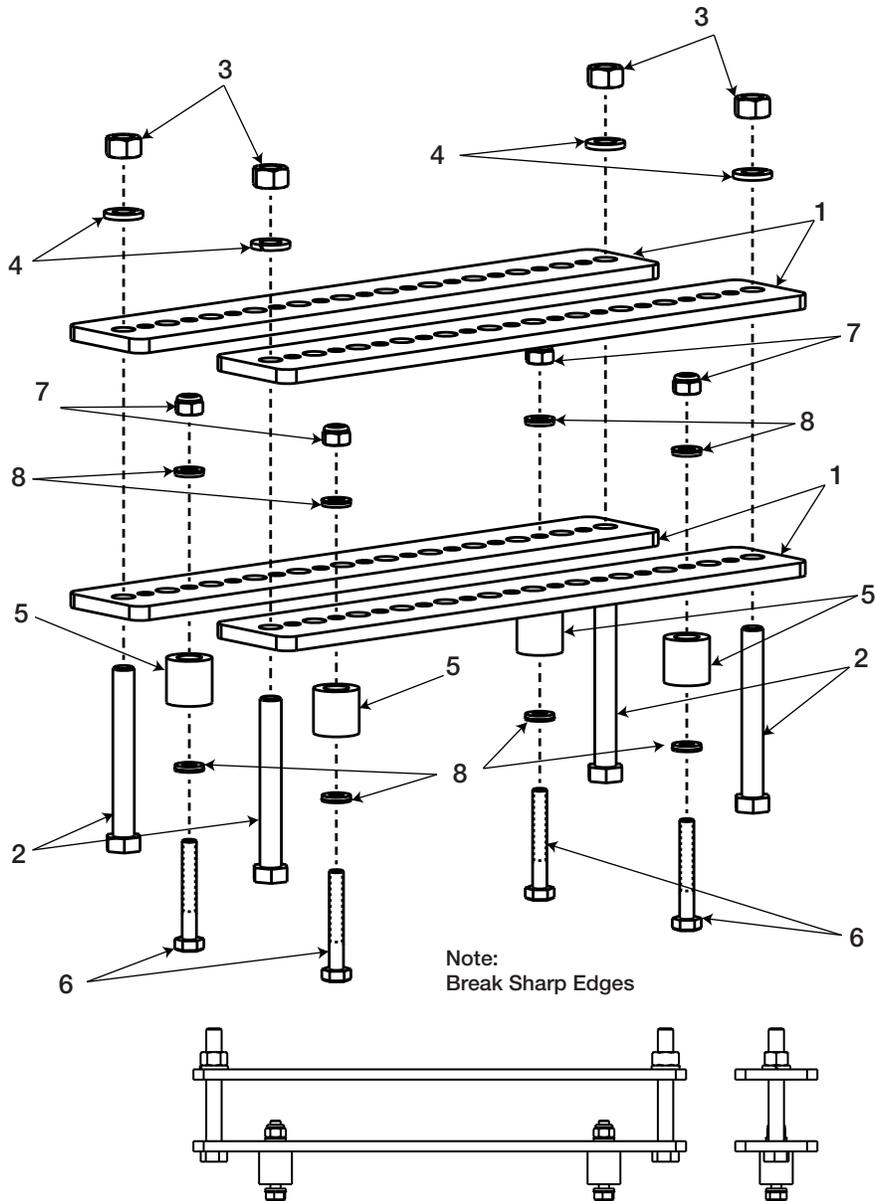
Plate Assembly, Power/Communication Box Cage Mount
